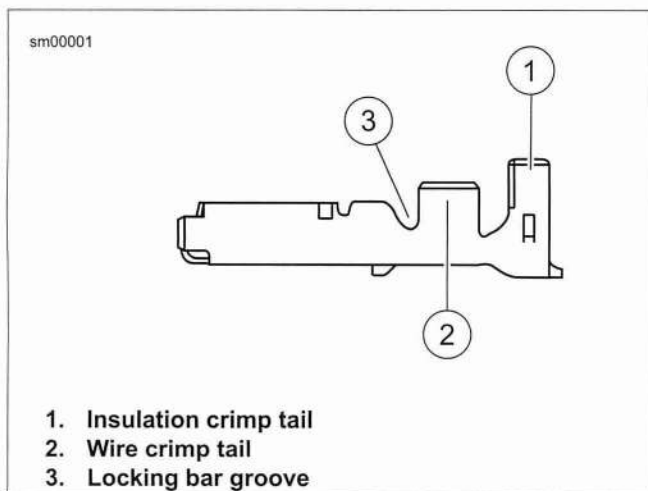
Tyco 070 Multilock Unsealed Connector: Socket Terminal
